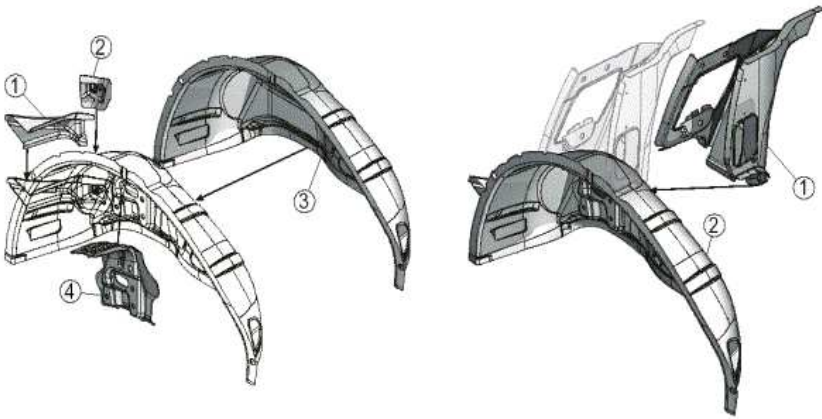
The rear wheelhouse consists of five parts. The parts are assembled in two stages.
